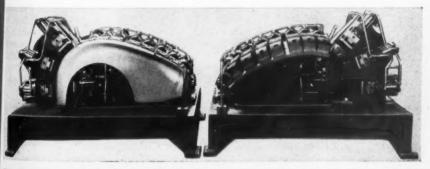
Fixture employing hydraulic piercing units for piercing holes in automobile rear fenders.
